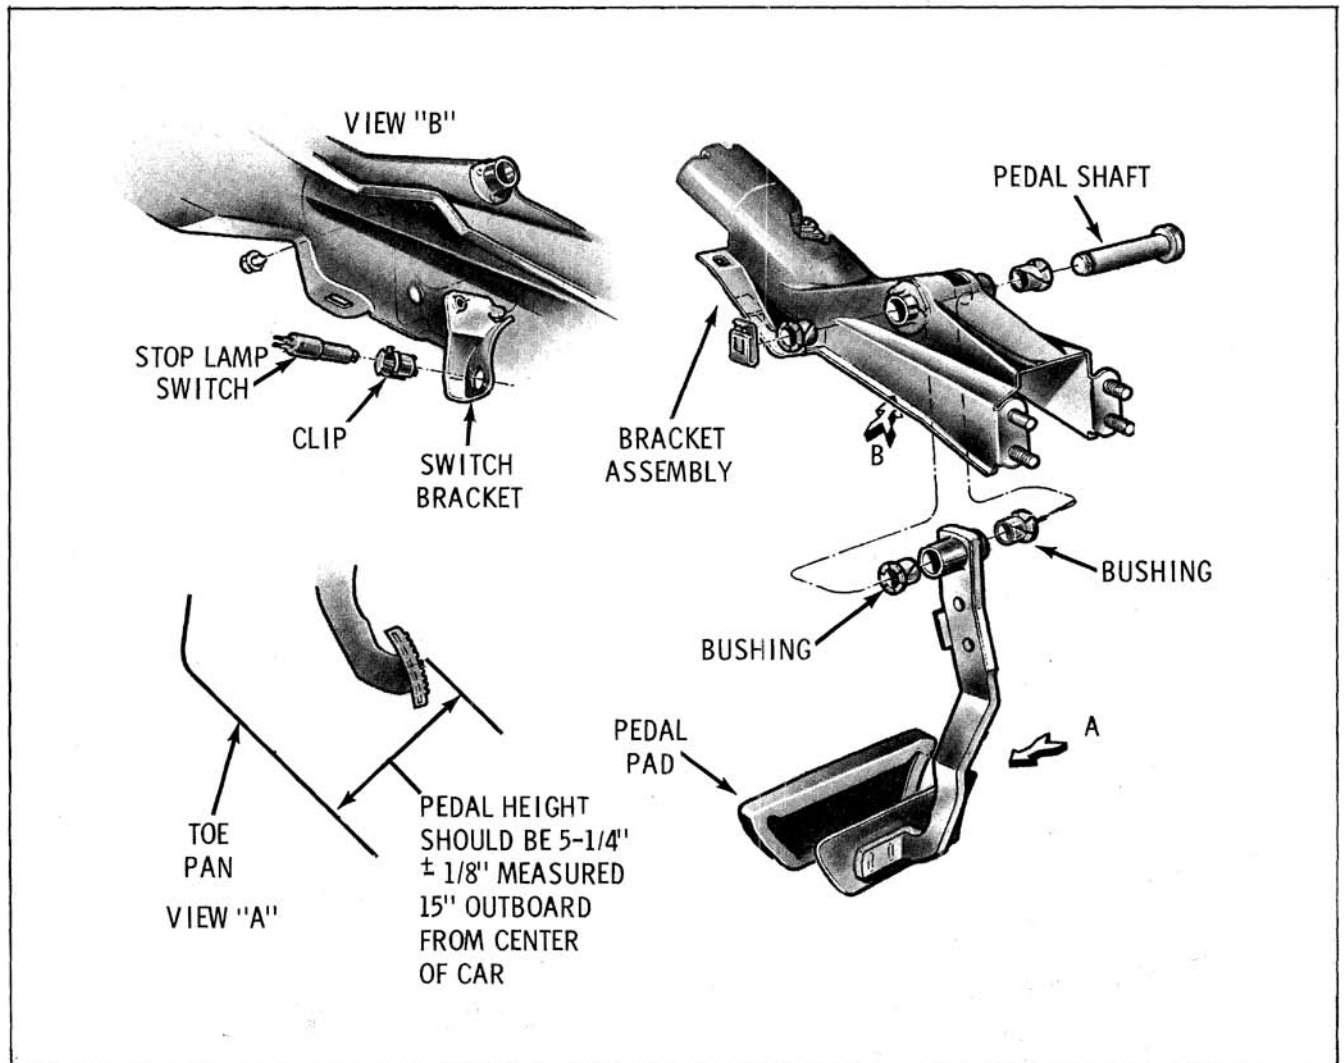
Brake Pedal Mounting (33 through 38 Series)
